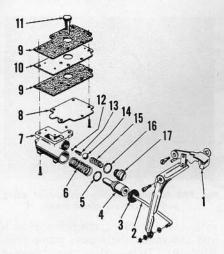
Exploded view of the manual chain oiler pump used on 700, 700-G, 750 and 850 models. Plug (11) is not used on later models.
